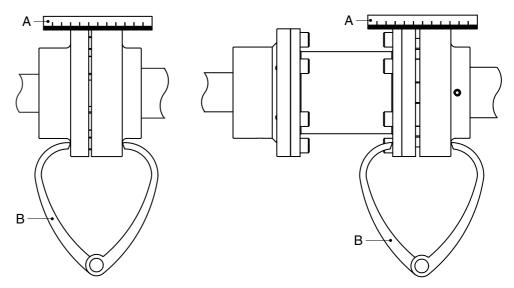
Aligning the coupling by means of a ruler and a pair of outside calipers.
